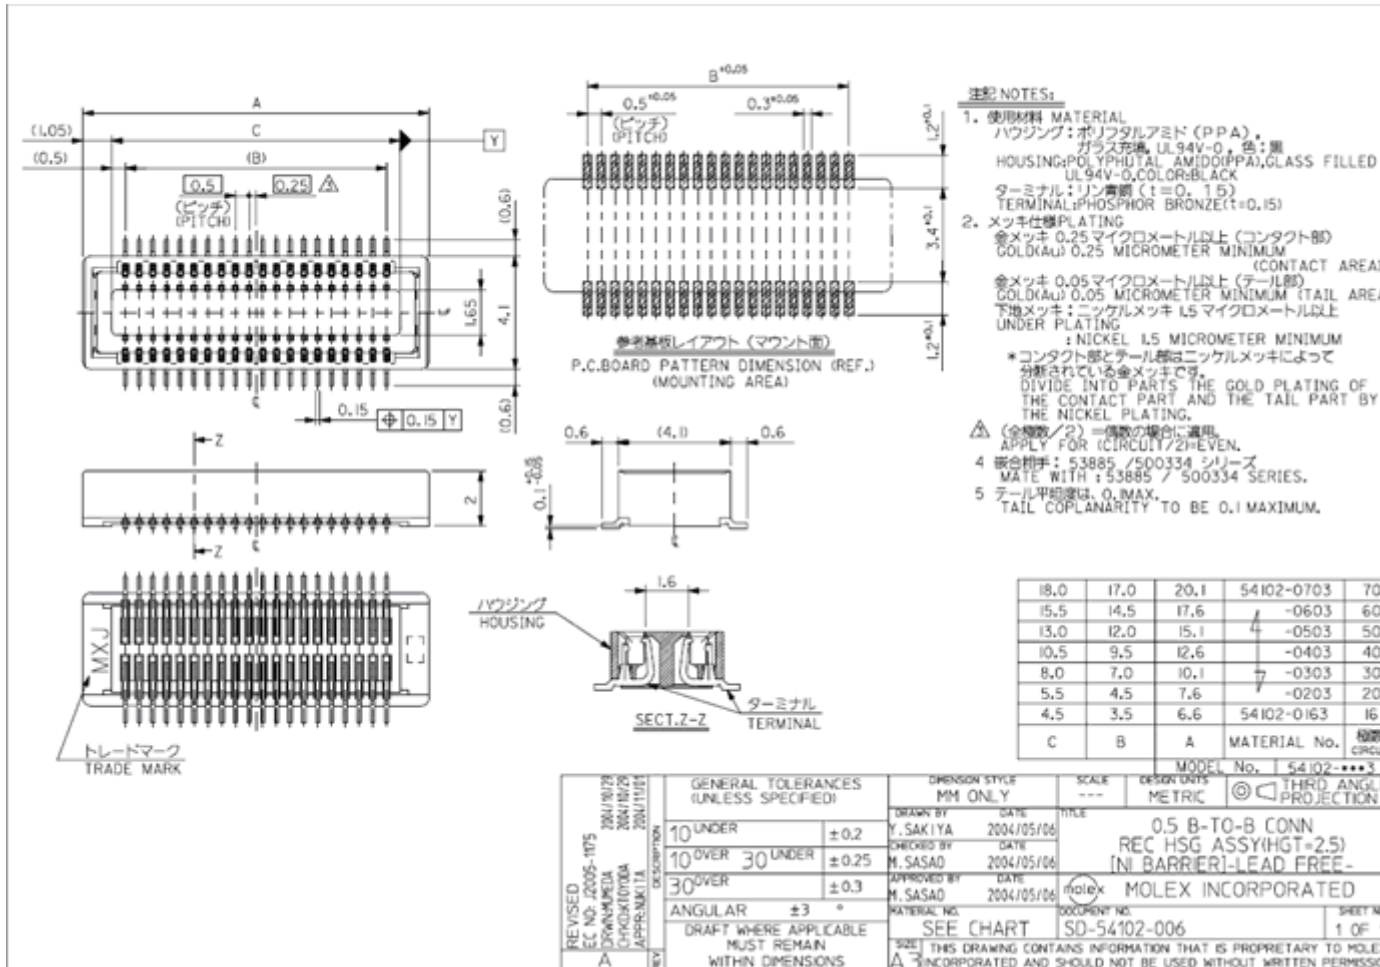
Mechanical dimensions of Molex 54102-0604 connector on BG2-E/BG2-W
